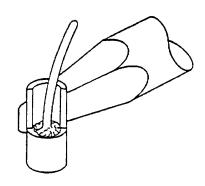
Solder Cup Termination (Sheet 1 of 2)
